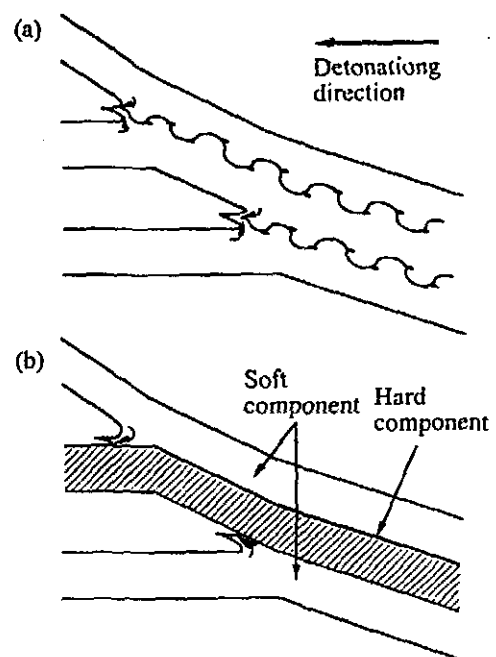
Formation of wavy interface (a) and planar interface (b) during explosive welding process.
